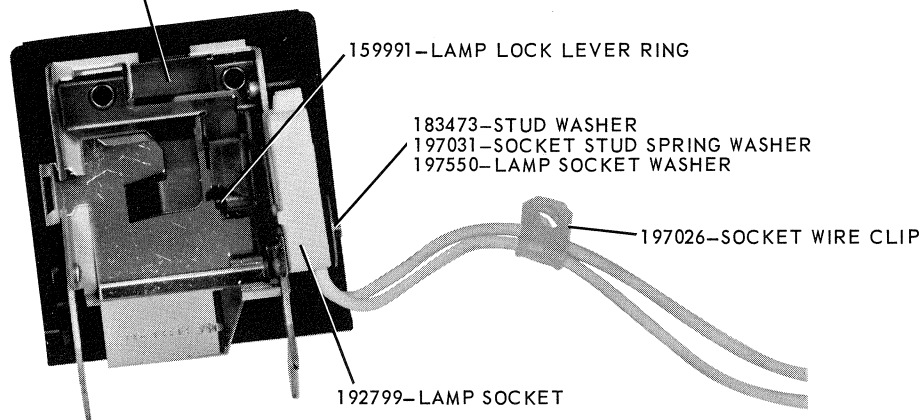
197004-LAMP DOOR ASSEMBLY
